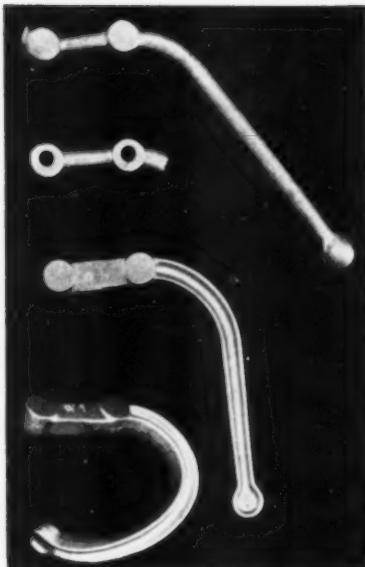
Original (top two pieces) and Redesign (lower two) to Overcome Metal Feeding Problems Through a Heavier Feeding Section and Changed Section Shape. Bottom piece is bent to show toughness.
